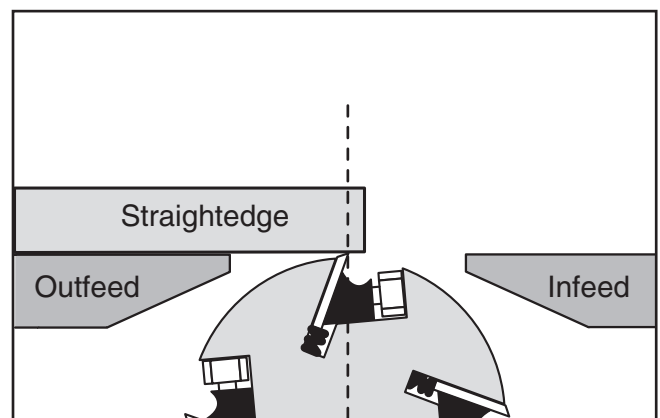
Using a straightedge to align outfeed table height with knife at TDC.
